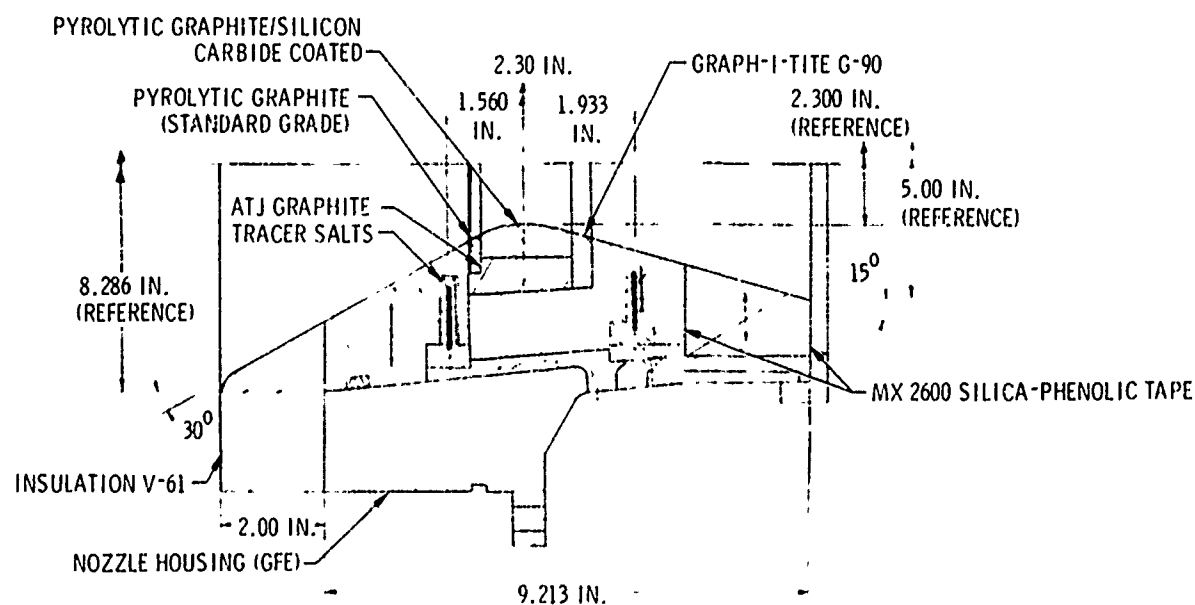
Silica-Phenolic Nozzle Assembly S/N 02 with Pyrolytic-Graphite-Coated Throat
